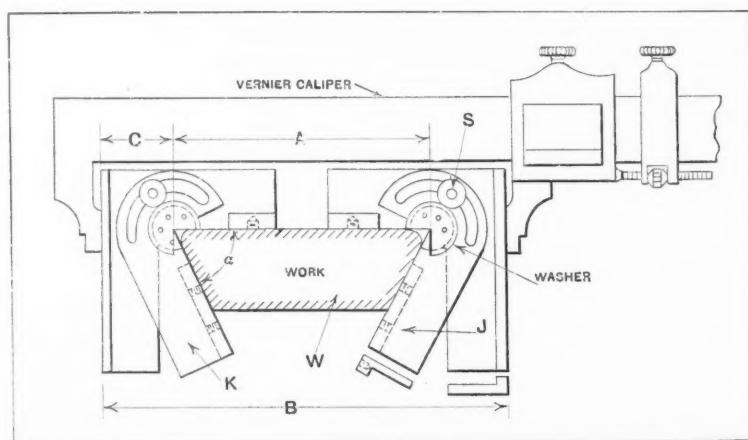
Vernier Caliper with Attachment for Measuring Dovetail
